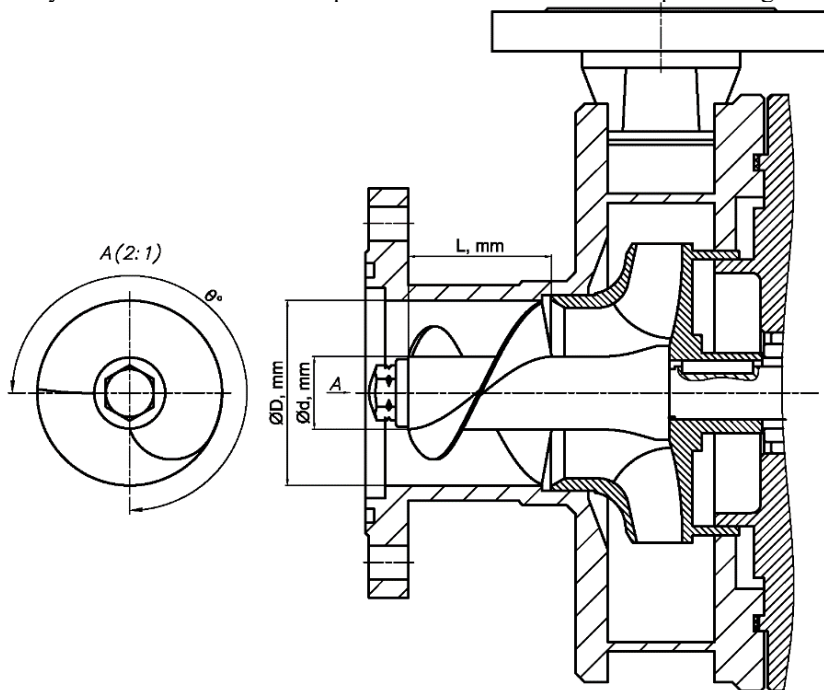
Drawing of the pumping part of the centrifugal pump, with indication of optimization parameters
